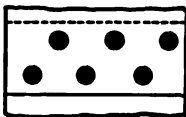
Double-riveted lap-joint zigzag-riveted.
